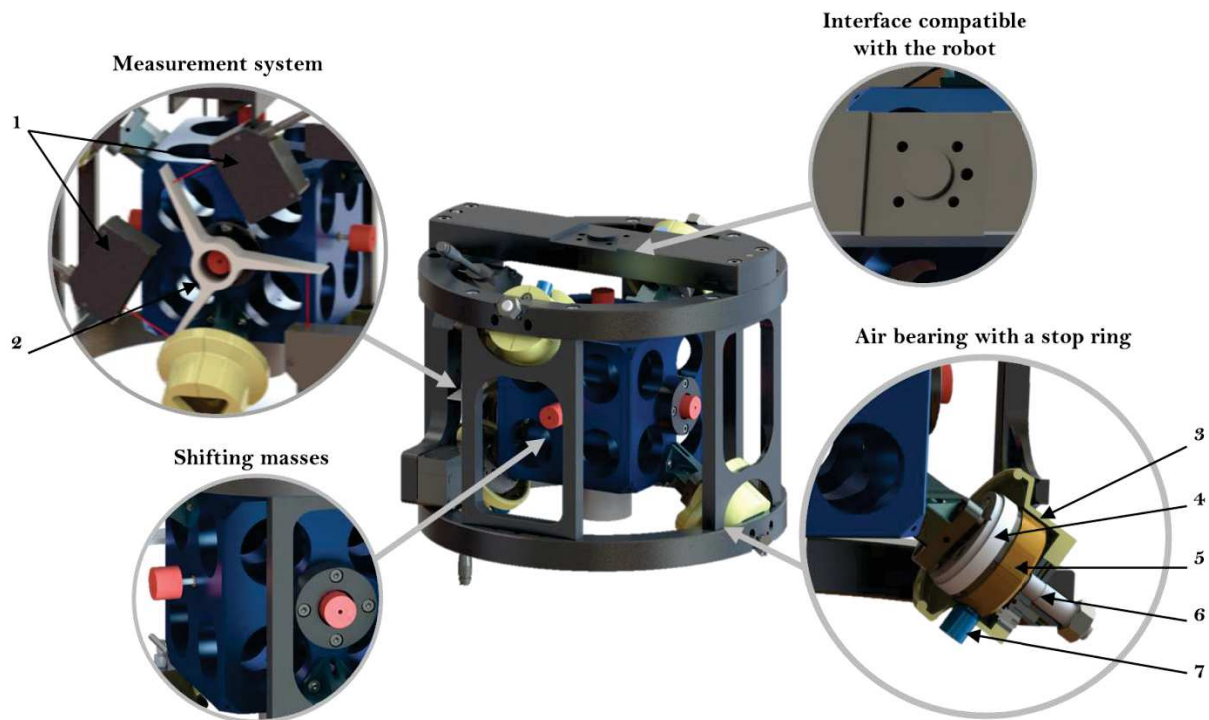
The AirBall prototype: 1 – Distance sensors; 2 – Target for measurements; 3 – Stop ring; 4 – Passive part of the air bearing; 5 – Active part of the air bearing; 6 – Spherical joint; 7 – Air inlet
